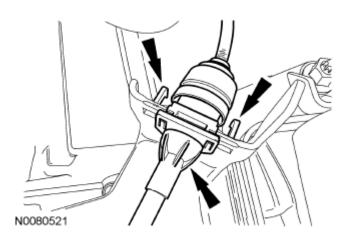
Locating Shift Cable Pin-Type Retainer Courtesy of FORD MOTOR CO.
